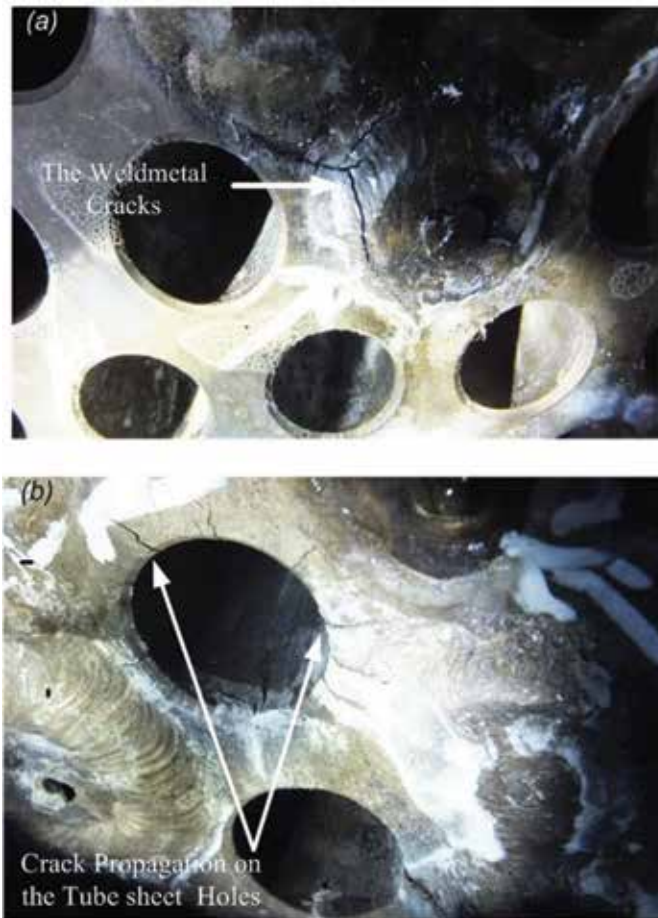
Failed area (a) cracks extending in the weld joint of tube sheet to plugs and (b) branched cracks in the surface of the tube sheet and through the holes [8].
